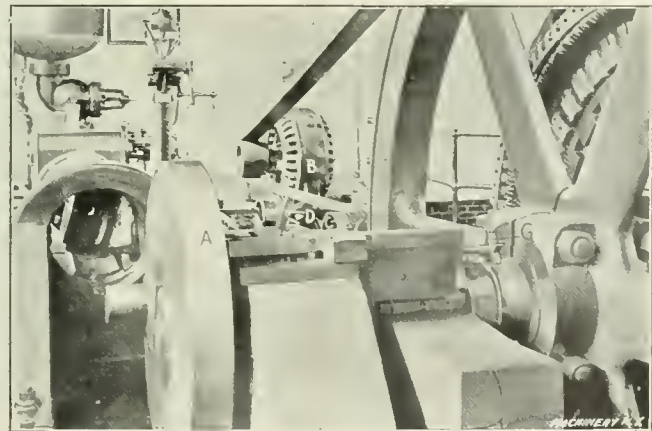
View showing how the Small Motor was belted to the Large Flywheel
